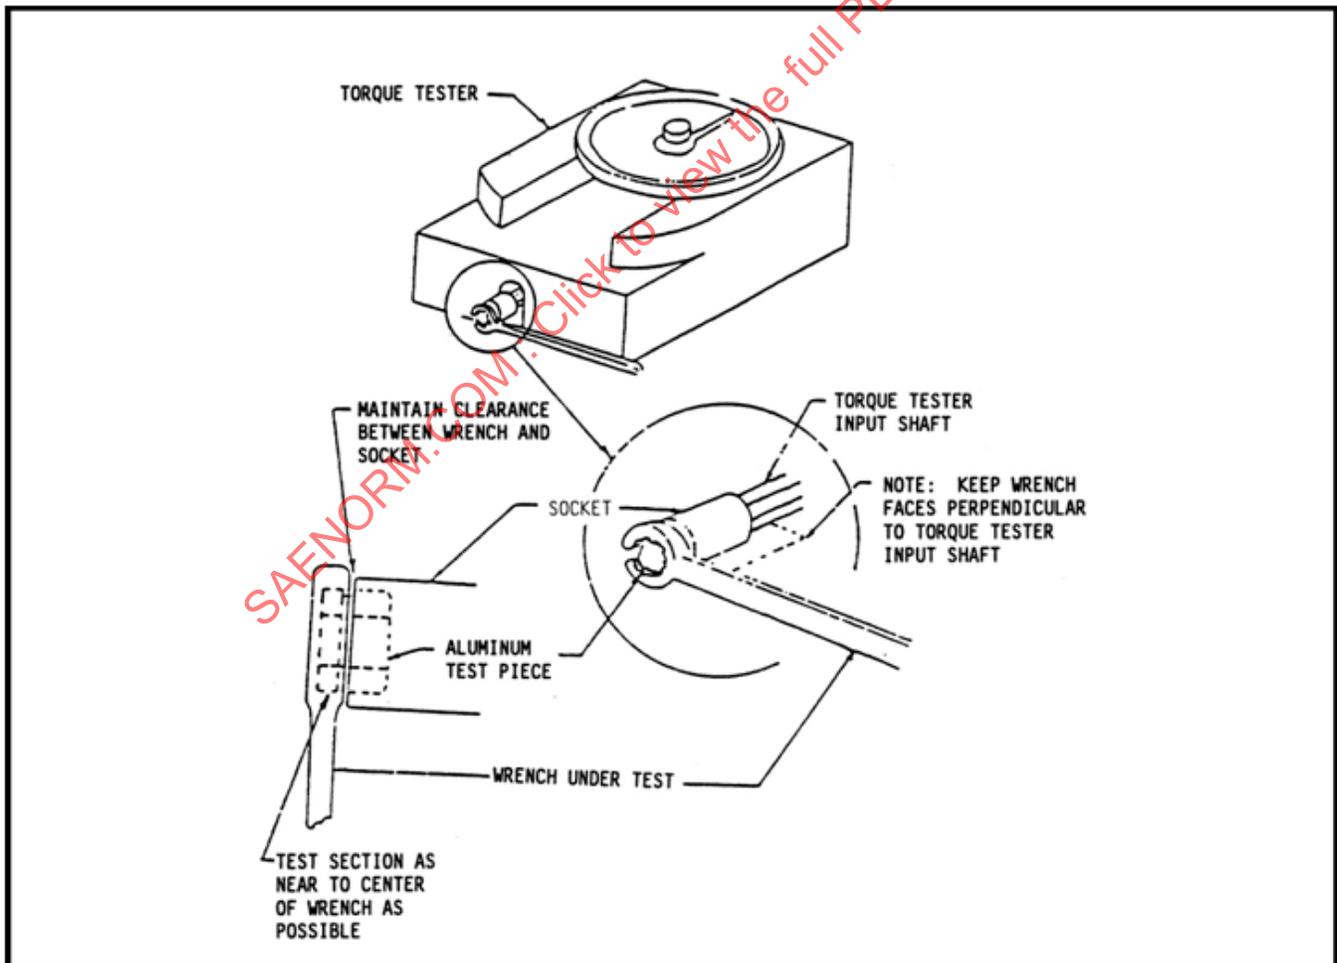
TYPICAL TEST SETUP FOR ALUMINUM MANDREL TEST
